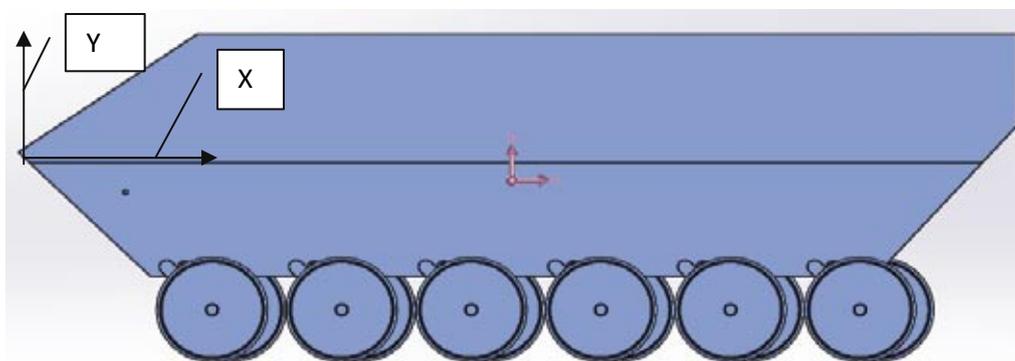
Computational model of the hull (Z axis perpendicular to the drawing plane)
